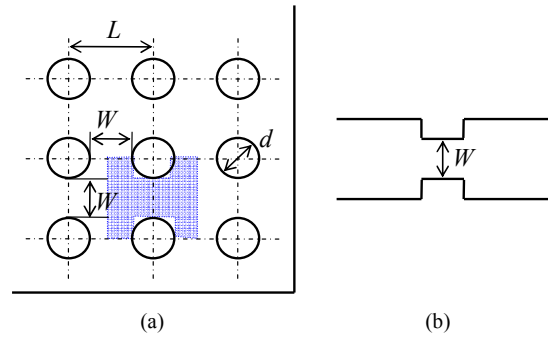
Flip chip package pattern: (a) a rectangular array of the solder bump pattern; (b) an approximate flow passage through a solder bump array.
